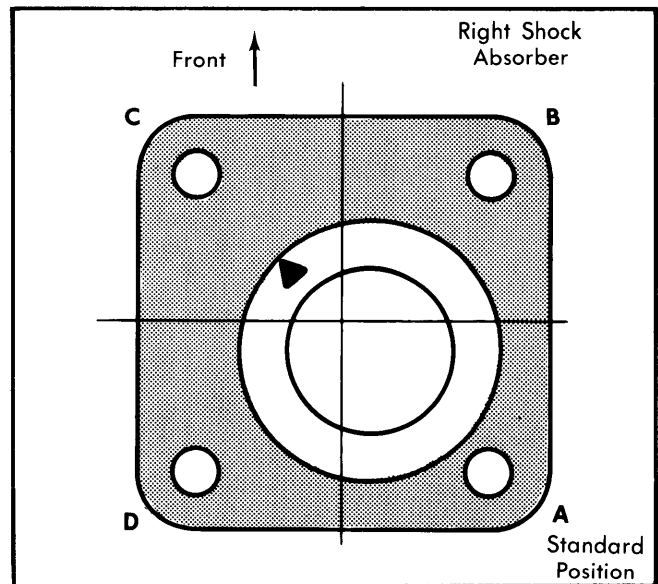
RX7 & 626 Caster and Camber Adjusting Pad (Position "C" Shown)
